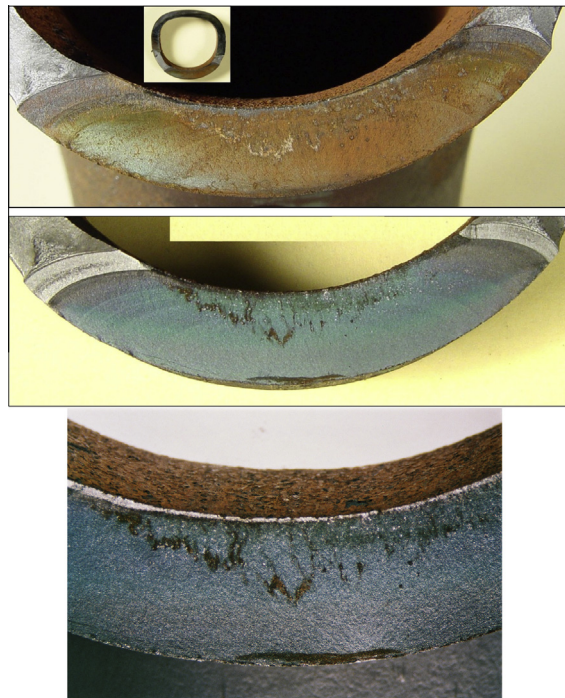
Fracture surface found after opening a cracked tube. Enlargement of Fig. 12. Top: as opened; middle: after removal of rust using citric acid. Rest lines and annealing colours were found on the fracture surfaces, bottom: middle section, showing that coloured crack growth region has not grown through. (For interpretation of the references to colour in this figure legend, the reader is referred to the web version of this article.)
